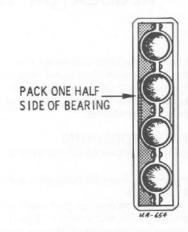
PACKING ONE SIDE OF BEARING WITH LUBE (BRB NO. 2)
